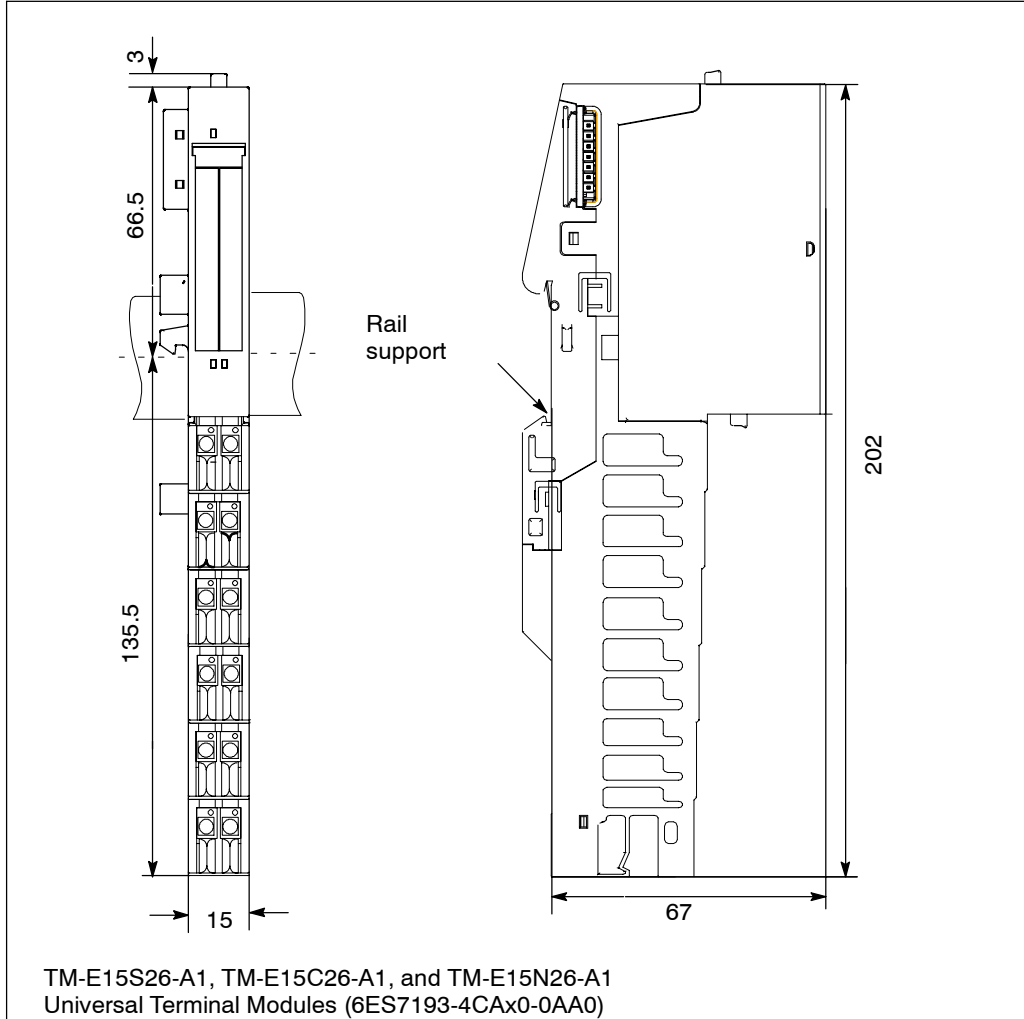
Dimensioned Drawing of Terminal Modules (Fast Connect) with an Electronic Module Inserted
